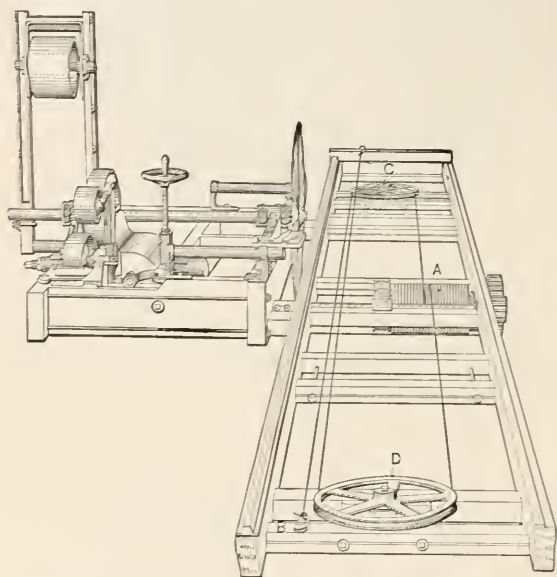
A Cable Feed for a Portable Sawmill Carriage. A. The Power-driven Grooved Drum which drives the Cable. B. One Point of Attachment of the Cable to the Carriage. C and D. Idlers or Sheaves, attached to the Carriage Frame, around which the Cable passes.
